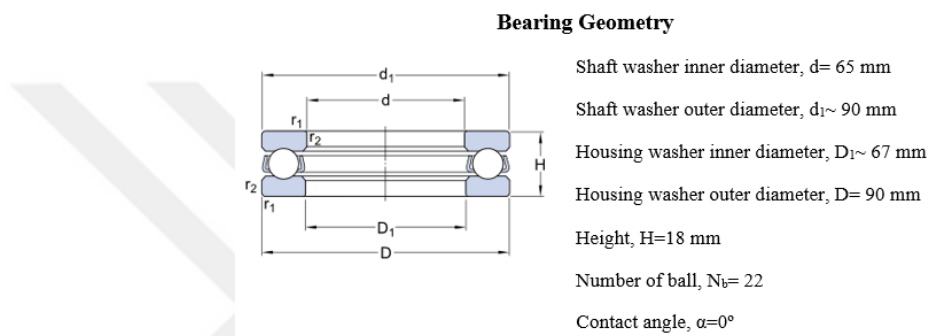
Thrust ball bearing geometry - FEB, 51113 (SKF, 2019)
